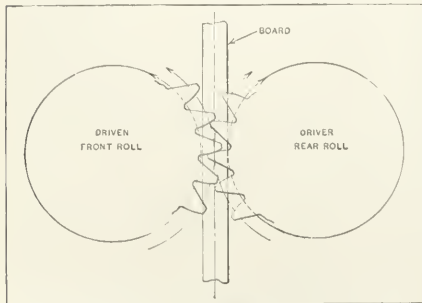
Diagram illustrating Shape of Teeth on Friction Roll Gears
